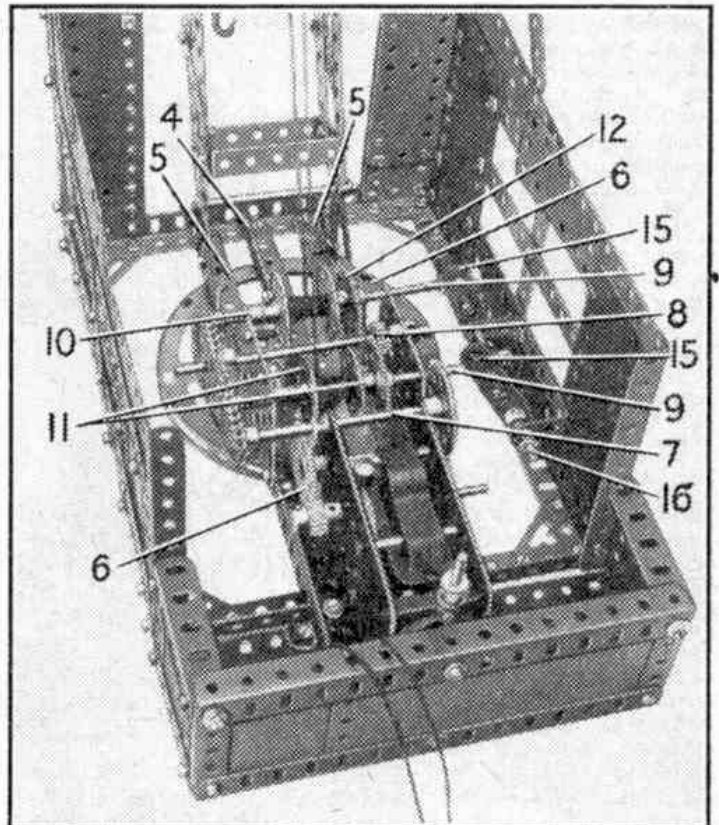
The mechanism and Motor inside the driver's cab, the roof of which has been removed.
